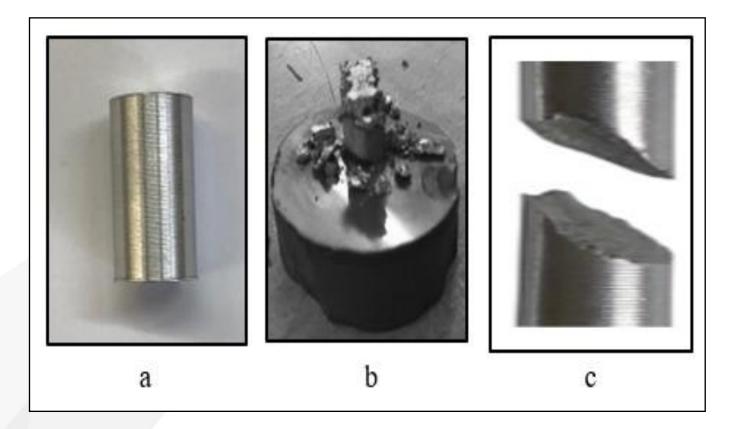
a. The compression test specimen, b. Extrusions specimen and c. Rheocasting sample ASTM standard
